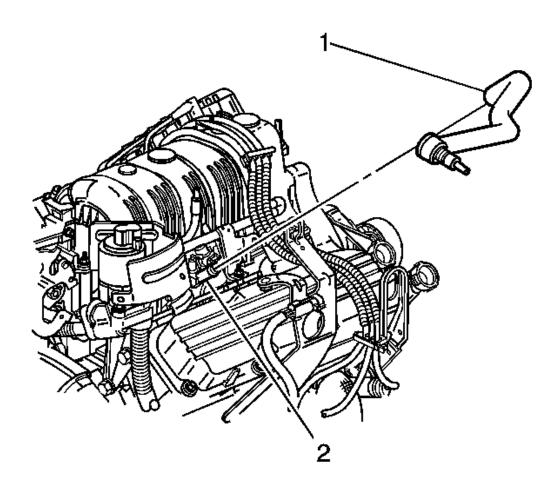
Brake Booster Hose & Vacuum Source Manifold Courtesy of GENERAL MOTORS CORP.
